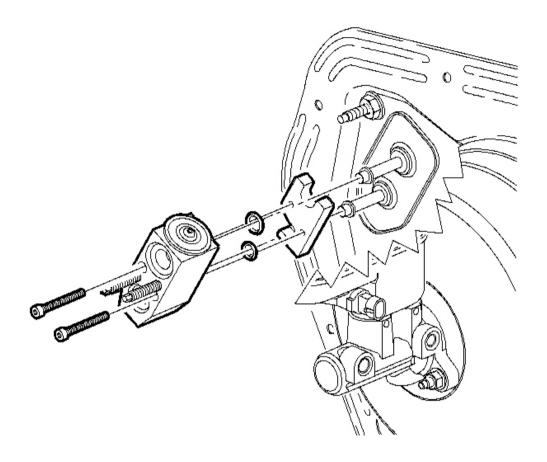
Evaporator Pipe Cover, Screw & Blower Case Assembly Courtesy of GENERAL MOTORS CORP.
